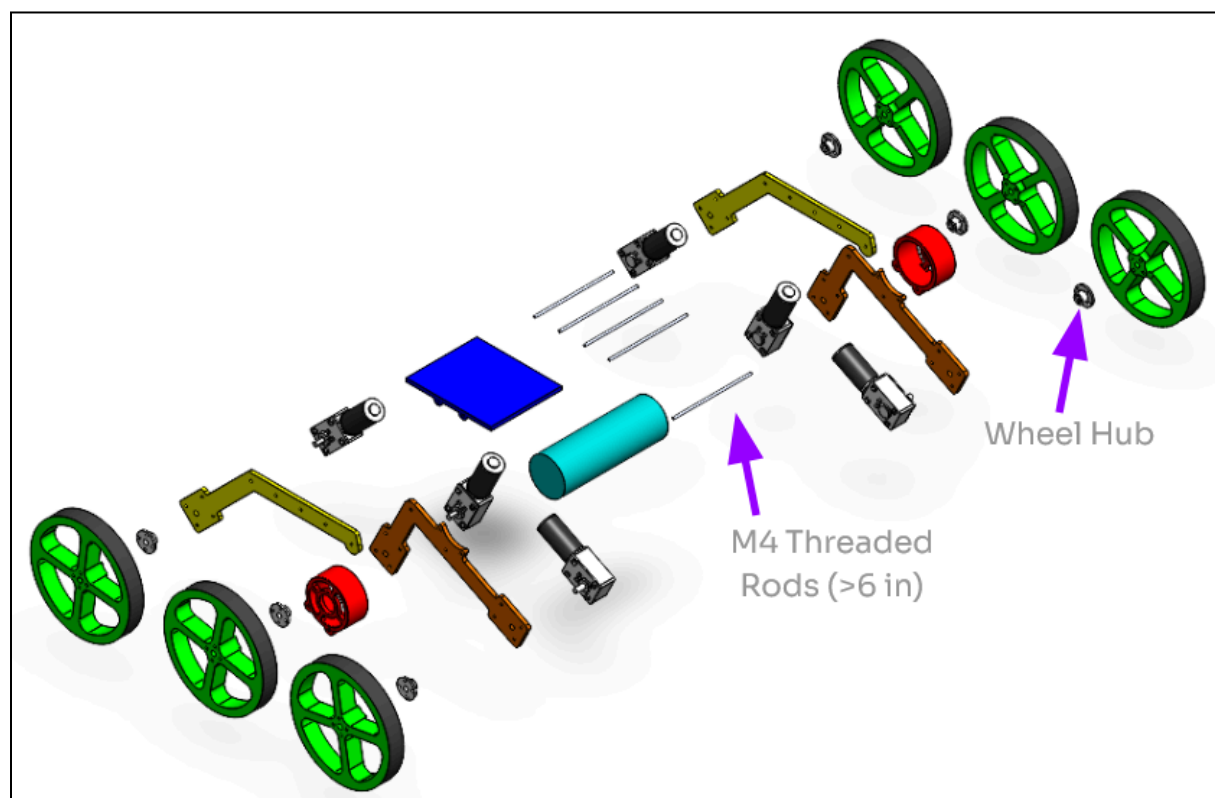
Exploded View of Preliminary Design. Wheels are mounted to motors using 8 mm wheel hubs and left and right chassis assemblies are connected through M4 threaded rods of minimum length 6 in.
